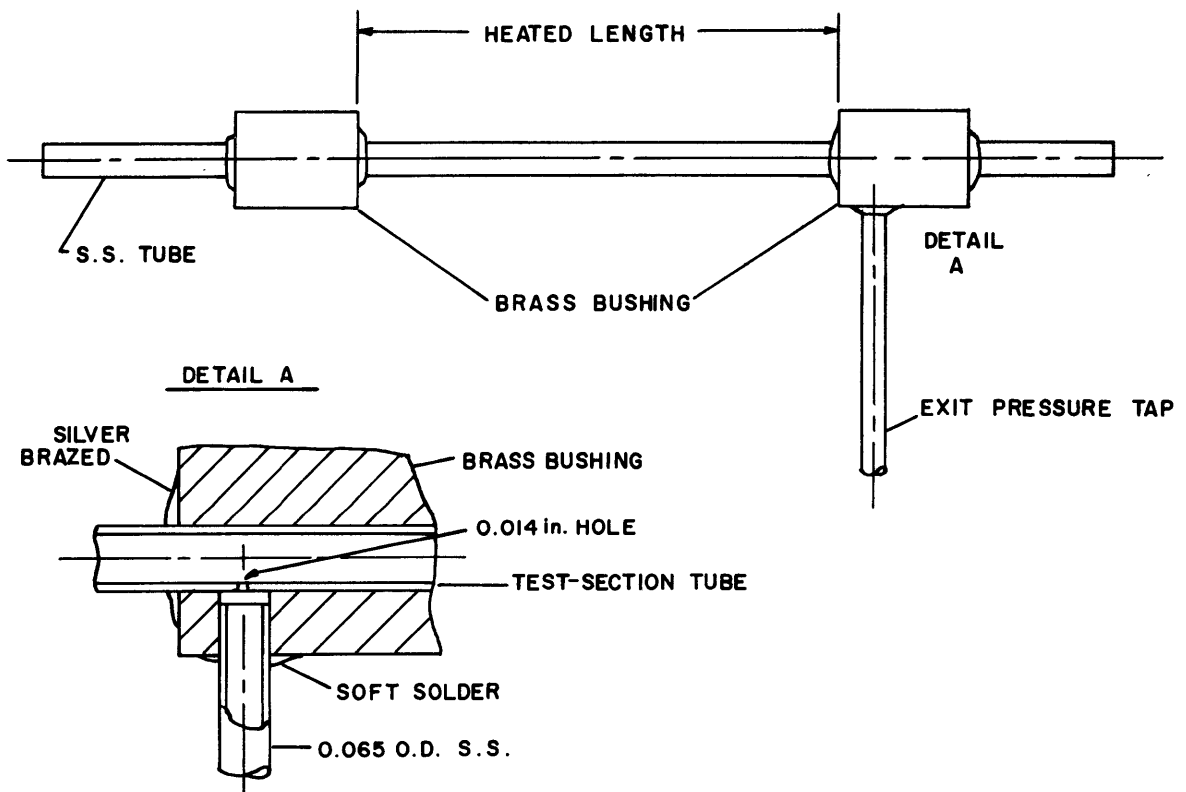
DETAILS OF STANDARD TUBULAR CHF TEST SECTIONS
